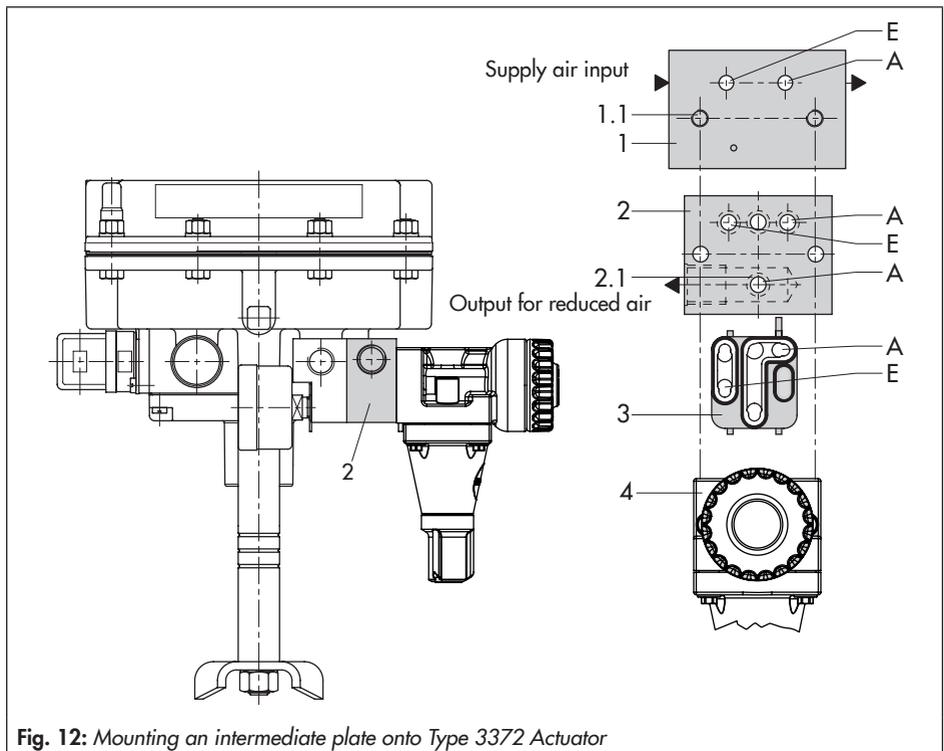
Mounting an intermediate plate onto Type 3372 Actuator
